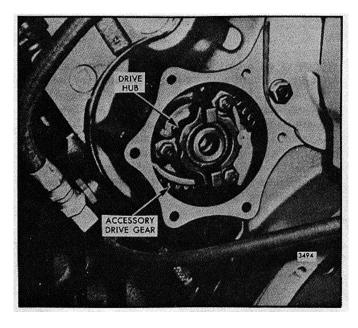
Rear Left-Bank Accessory Drive Mounting
